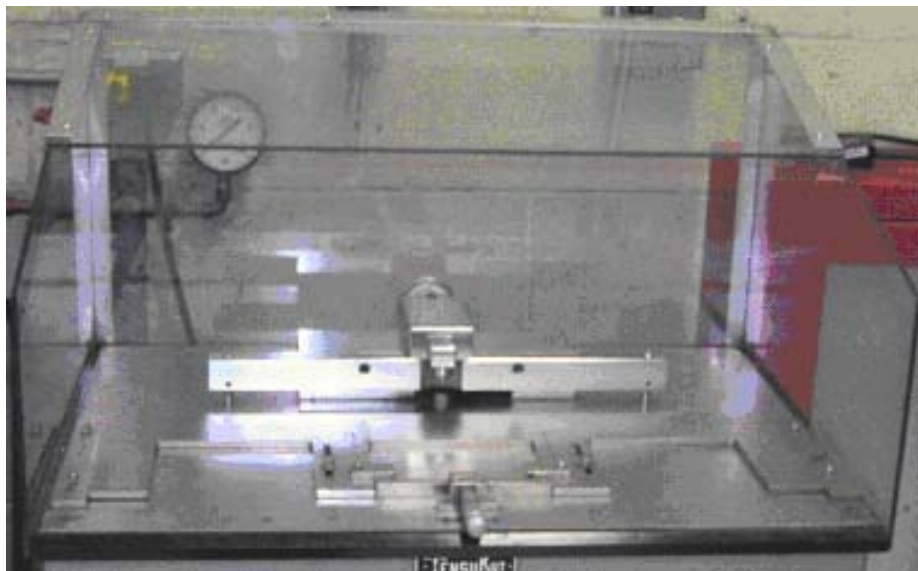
Tensile Cut Machine used for Trimming Panel to Final Width
